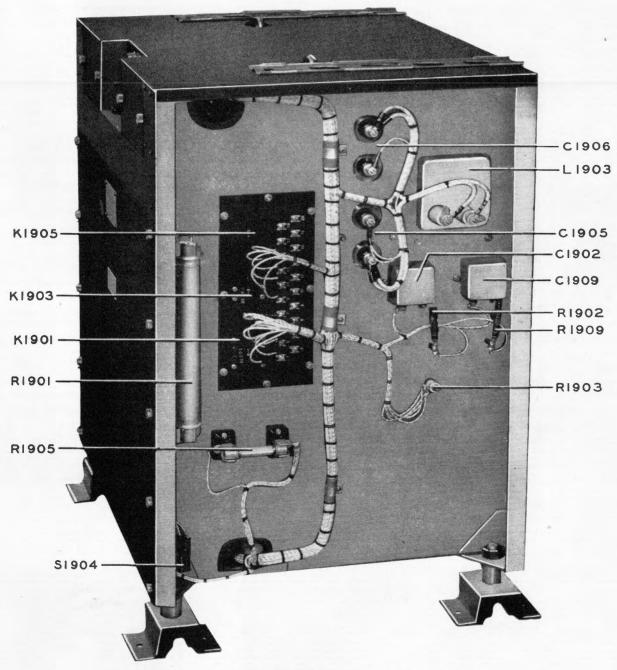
Type COL-211102 Dynamotor Assembly Right Side Open View
